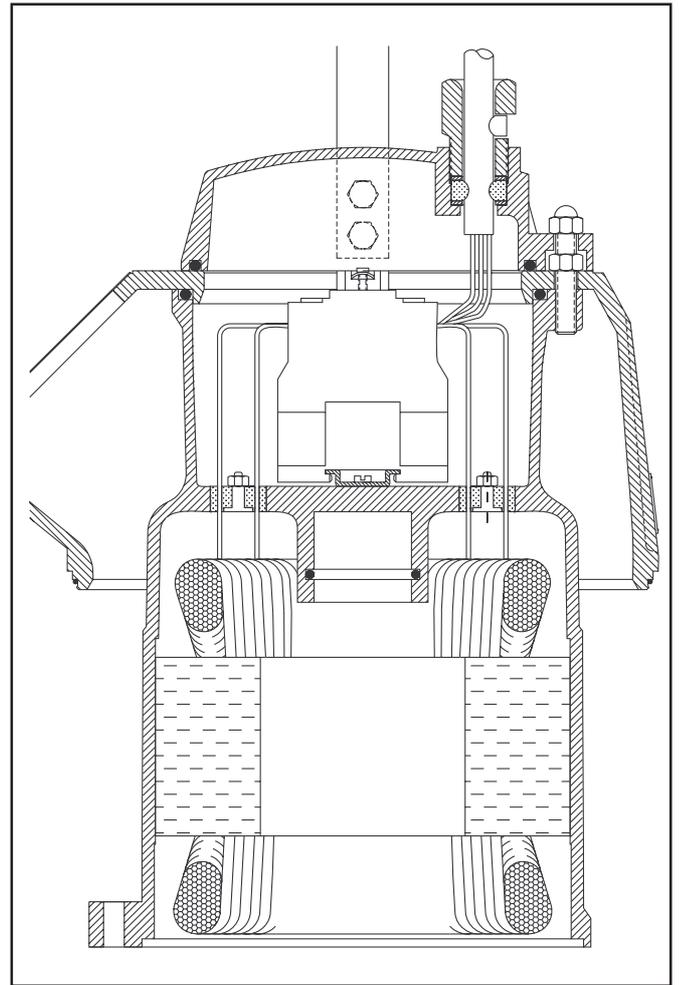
Assembling stator unit, contactor, main cover, cable gland and cover.
